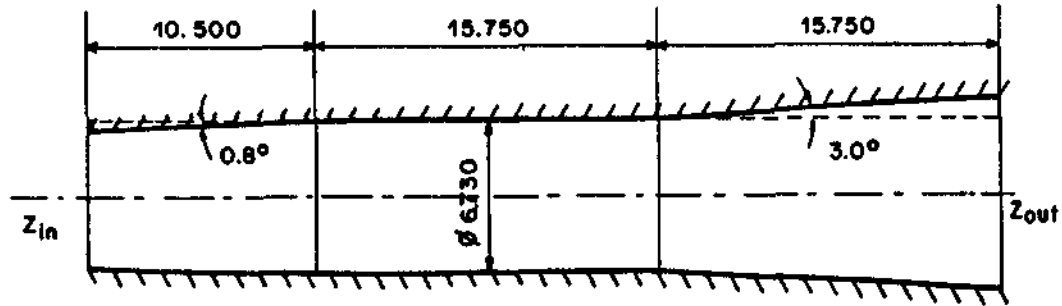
Cutaway view of tested resonator (dimensions in cm).
